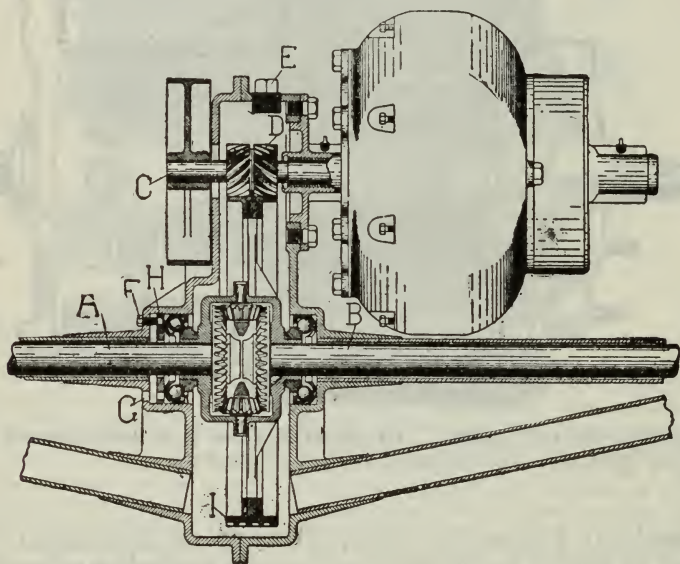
,069.—Diagram of a single motor attached to rear axle through "herringbone" single reducing gears. A, is the left hand section of the divided rear axle; B, the right hand section of the rear axle; C, the brake drum; D, the spiral pinion on the motor shaft driving the worm gear, I, on the differential; E, plug for greasing gears; F, set screw for locking ball race; G, slot for wrench to adjust threaded ring, H, against ball bearings.
